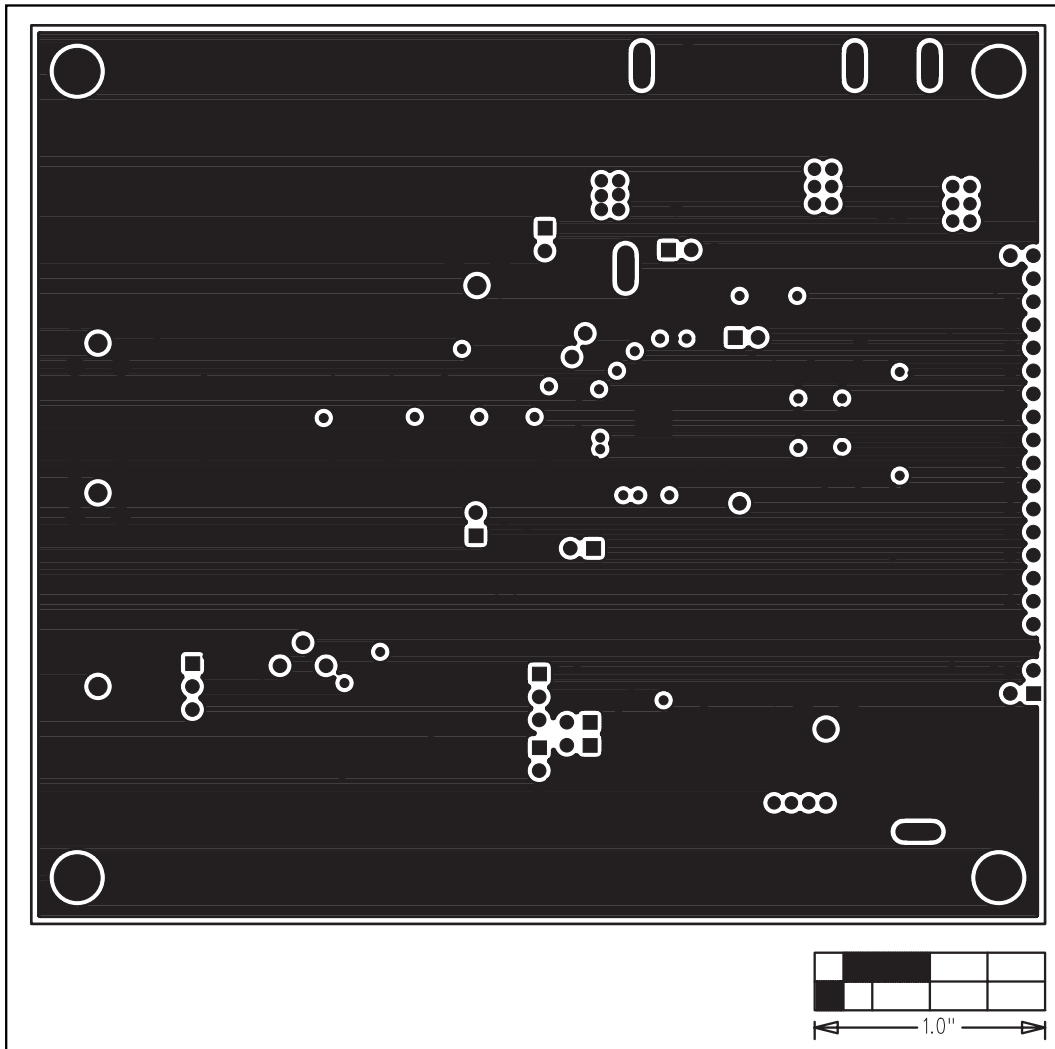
MAX1211 EV Kit PC Board Layout (Inner Layer 2)—Ground Planes
